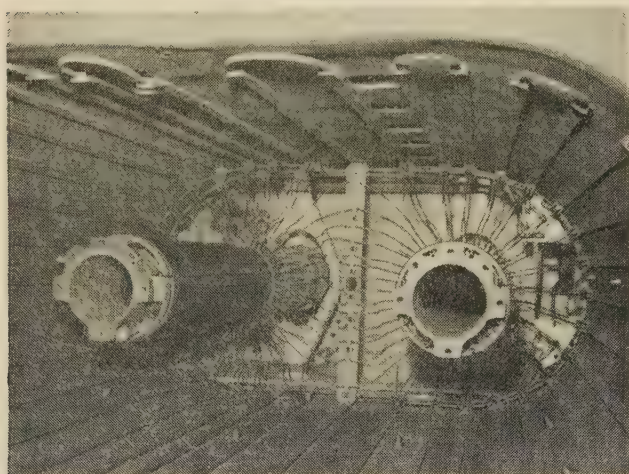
Short-circuit viewed from dees end during assembly, prior to fitting of dees.
